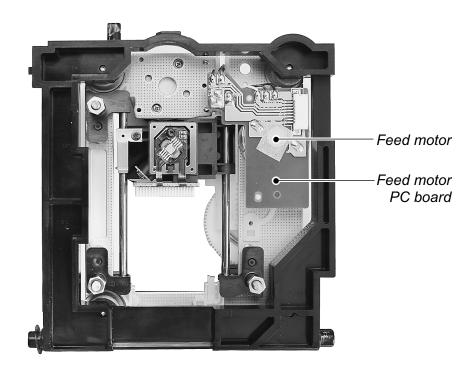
Pickup mechanism chassis assembly (Bottom side)
